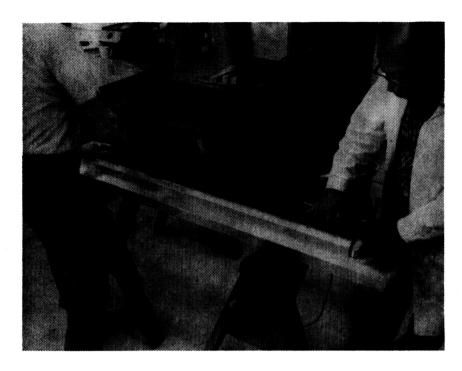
Photograph Showing a Two-Ply Detail Being Formed into the Hat Tool
